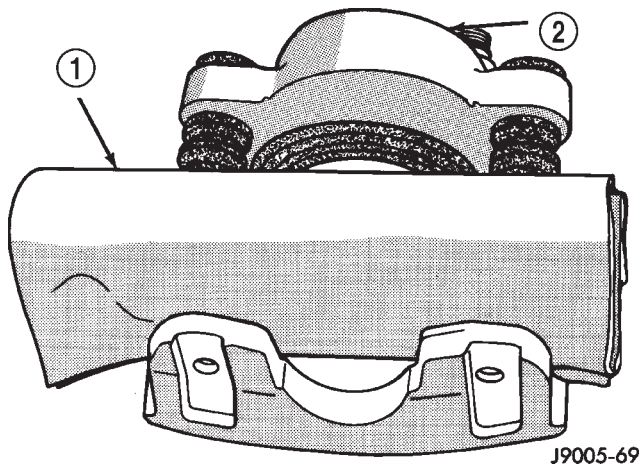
PADDING CALIPER INTERIOR - TYPICAL
